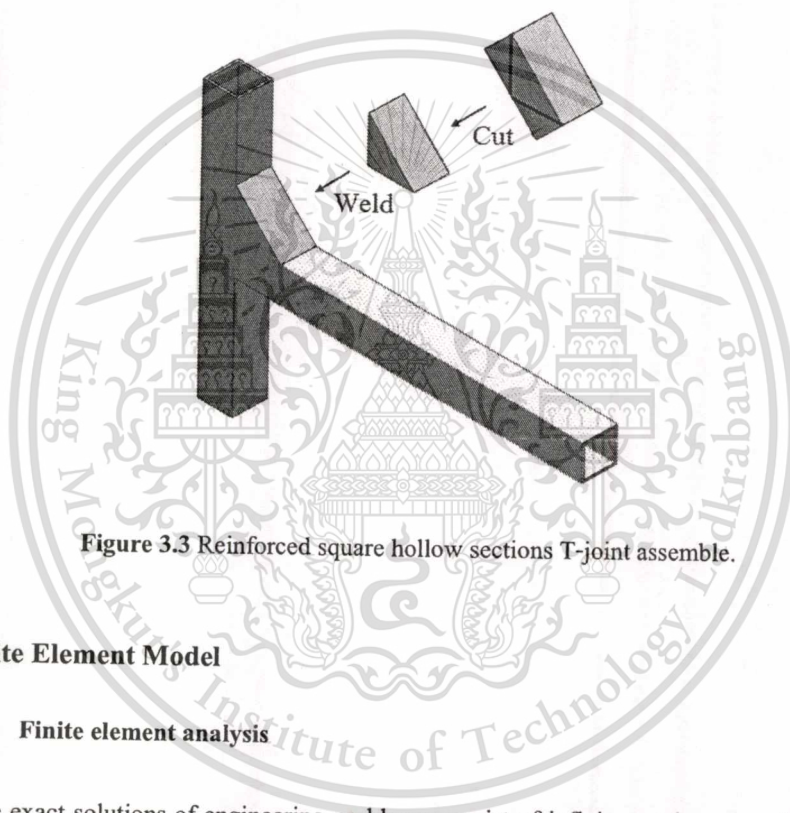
Reinforced square hollow sections T-joint assemble.
